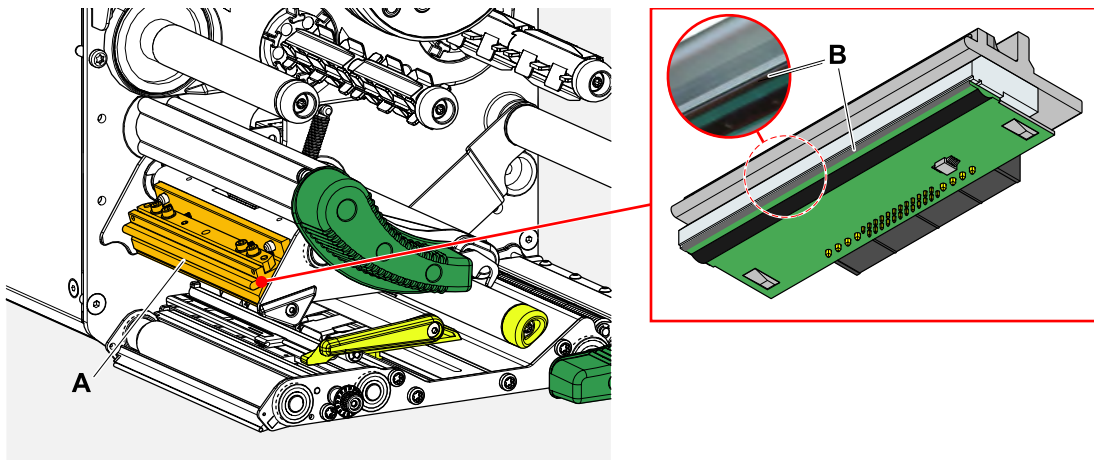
A: Print head, B: Thermal strip at the print head
